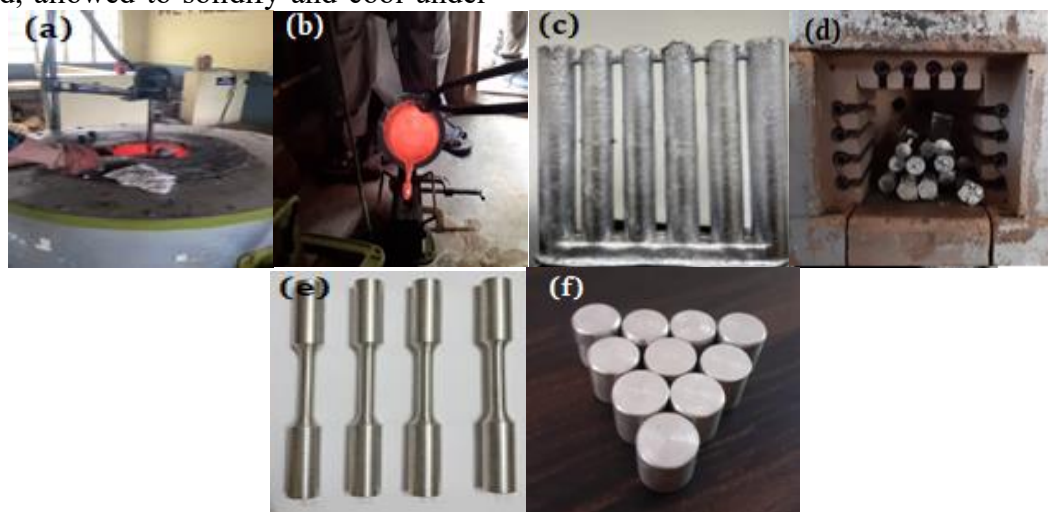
(a) Stir casting setup (b) Pouring of mixture in to moulds (c) Fabricated composite specimens (d) Heat treatment (e) Tensile test specimens (f) Hardness & Density test specimens
